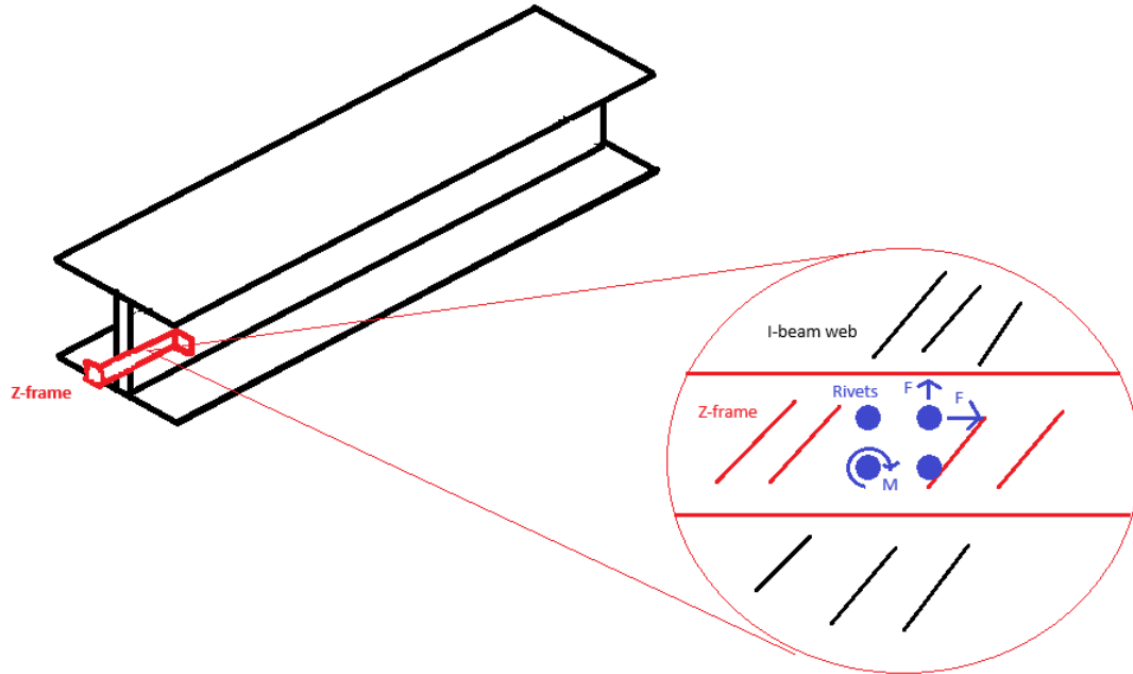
Beam and Z-frame attachment; Zoom-in rivets configuration.
